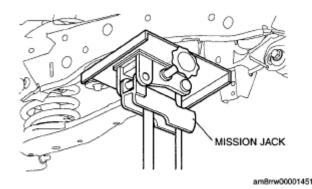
Supporting Crossmember Courtesy of MAZDA MOTORS CORP.
